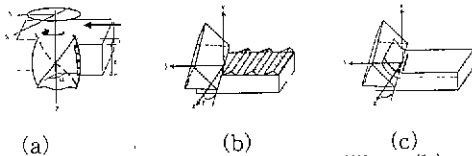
Schematics of (a) end milling, (b) spread end milling and (c) oblique cutting models
